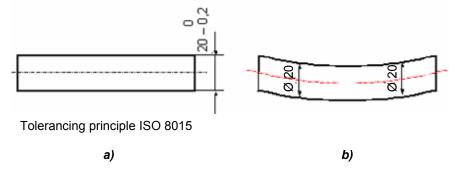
Application of independence principle on a shaft: a) Drawing; b) Part to be accepted
